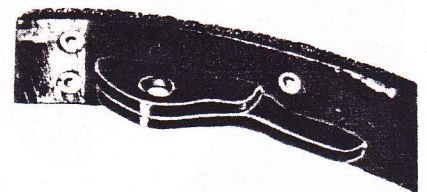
One end of the emergency brake band showing flush rivets and detail of boss that holds toggle links.
